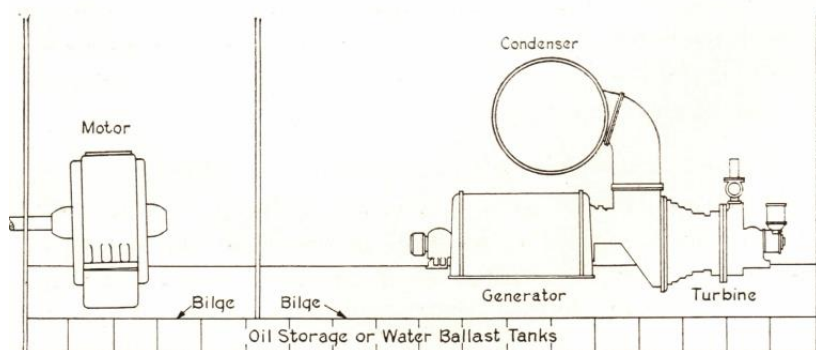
ELEVATION OF THE ENGINE ROOM ARRANGEMENT
